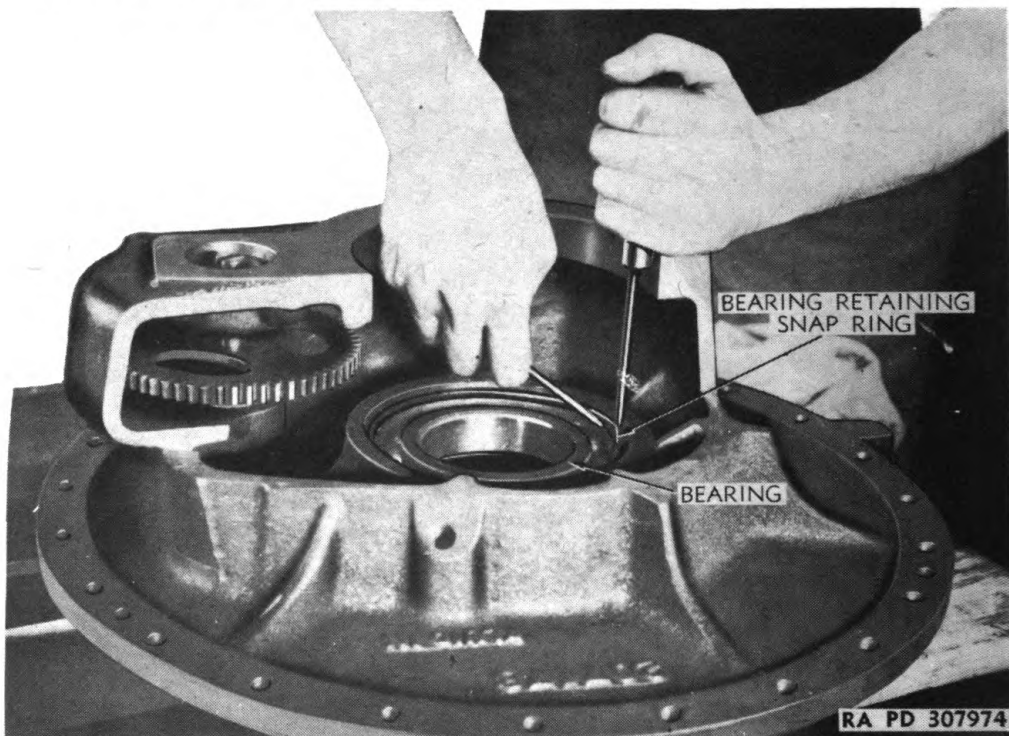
Removing Bearing Retaining Ring From Cover Plate
